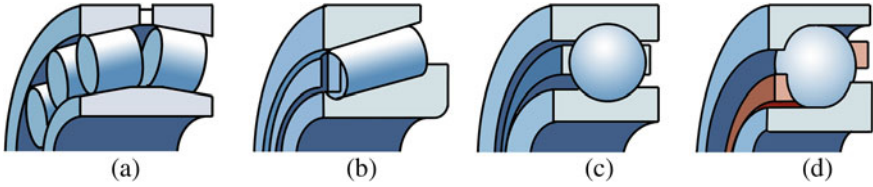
Bearings for combined radial and axial loads a spherical roller bearing, b tapered roller bearing, c deep-groove ball bearing, and d angular contact ball bearing [31]
